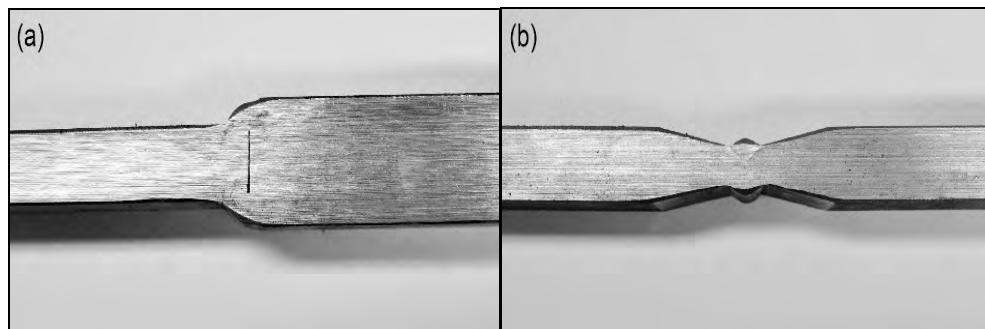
a) Test specimen #1 - fillet welded lap joint, b) Test specimen #2 - double V butt welded joint
